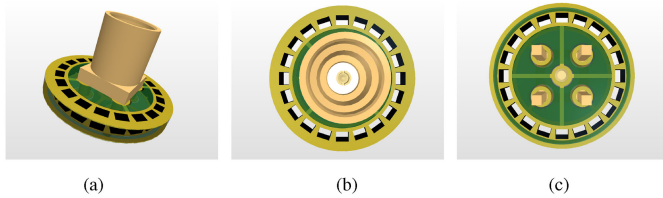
Surface mount coaxial shunt resistor PCB design #2. (a) Orthogonal view. (b) Top view. (c) Bottom view.
